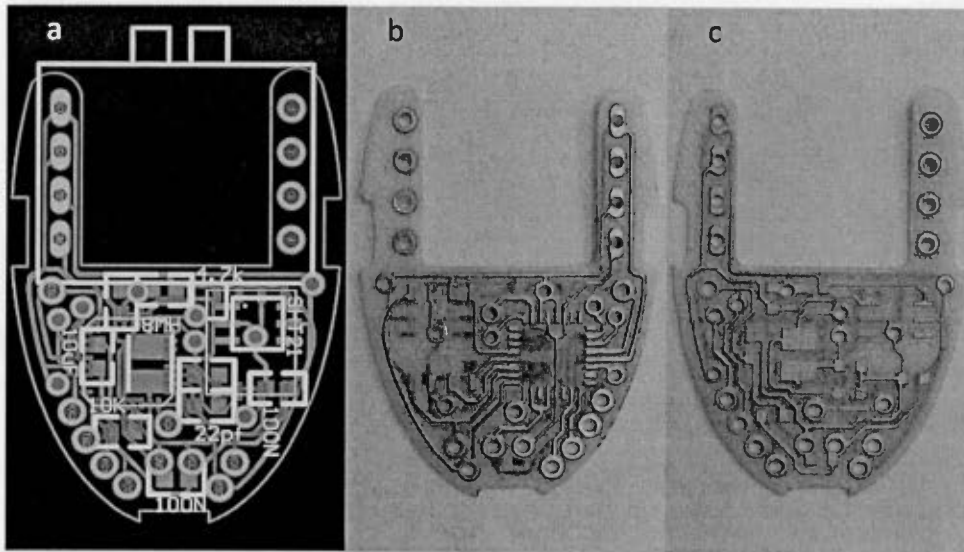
Designed and adapted PCB to be installed inside the PAS. (a) PCB diagram. (b) Fabricated PCB – bottom layer. (c) Fabricated PCB – top layer
